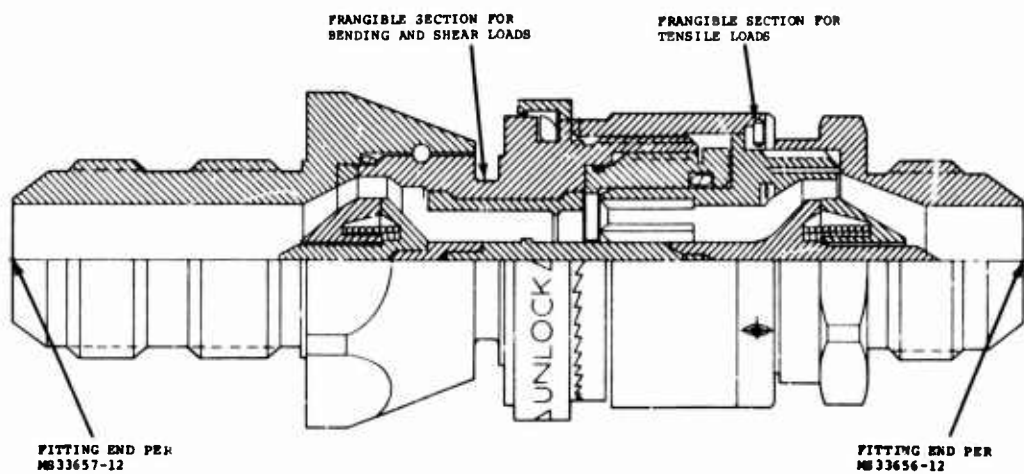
Bulkhead Valve With Quick Disconnect (Valve 2).
